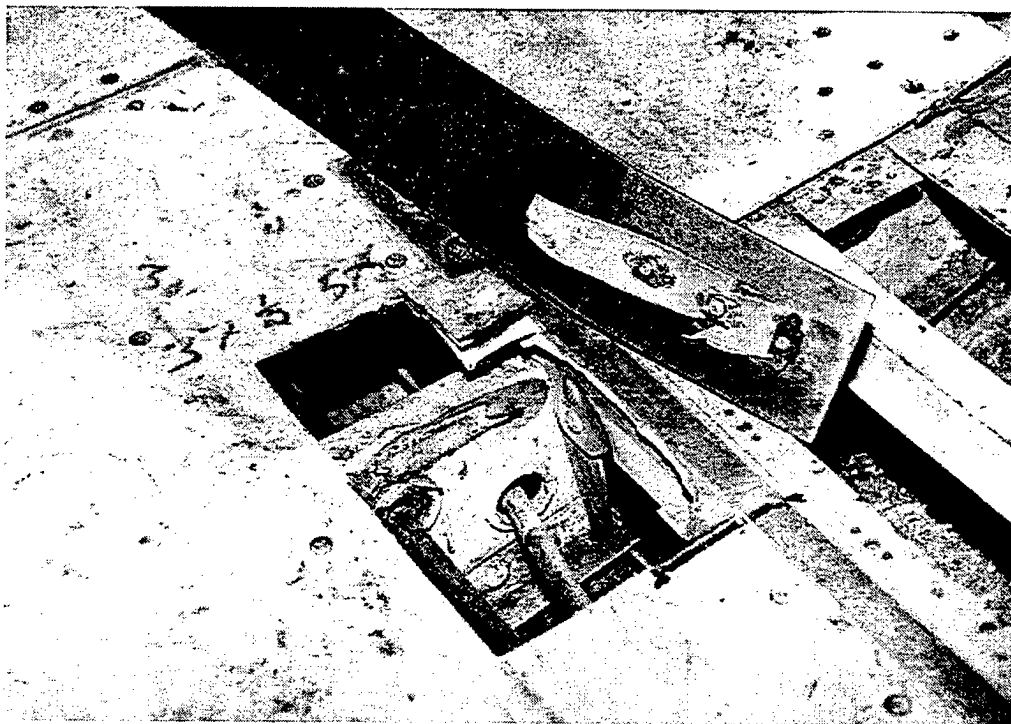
POSTTEST AUXILIARY FUEL TANK LOWER RIGHT BRACKET
